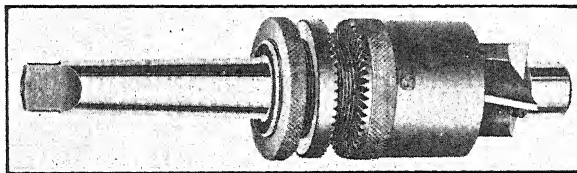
The Eclipse Improved Quick-Adjustable Stop-Collar Holder.
